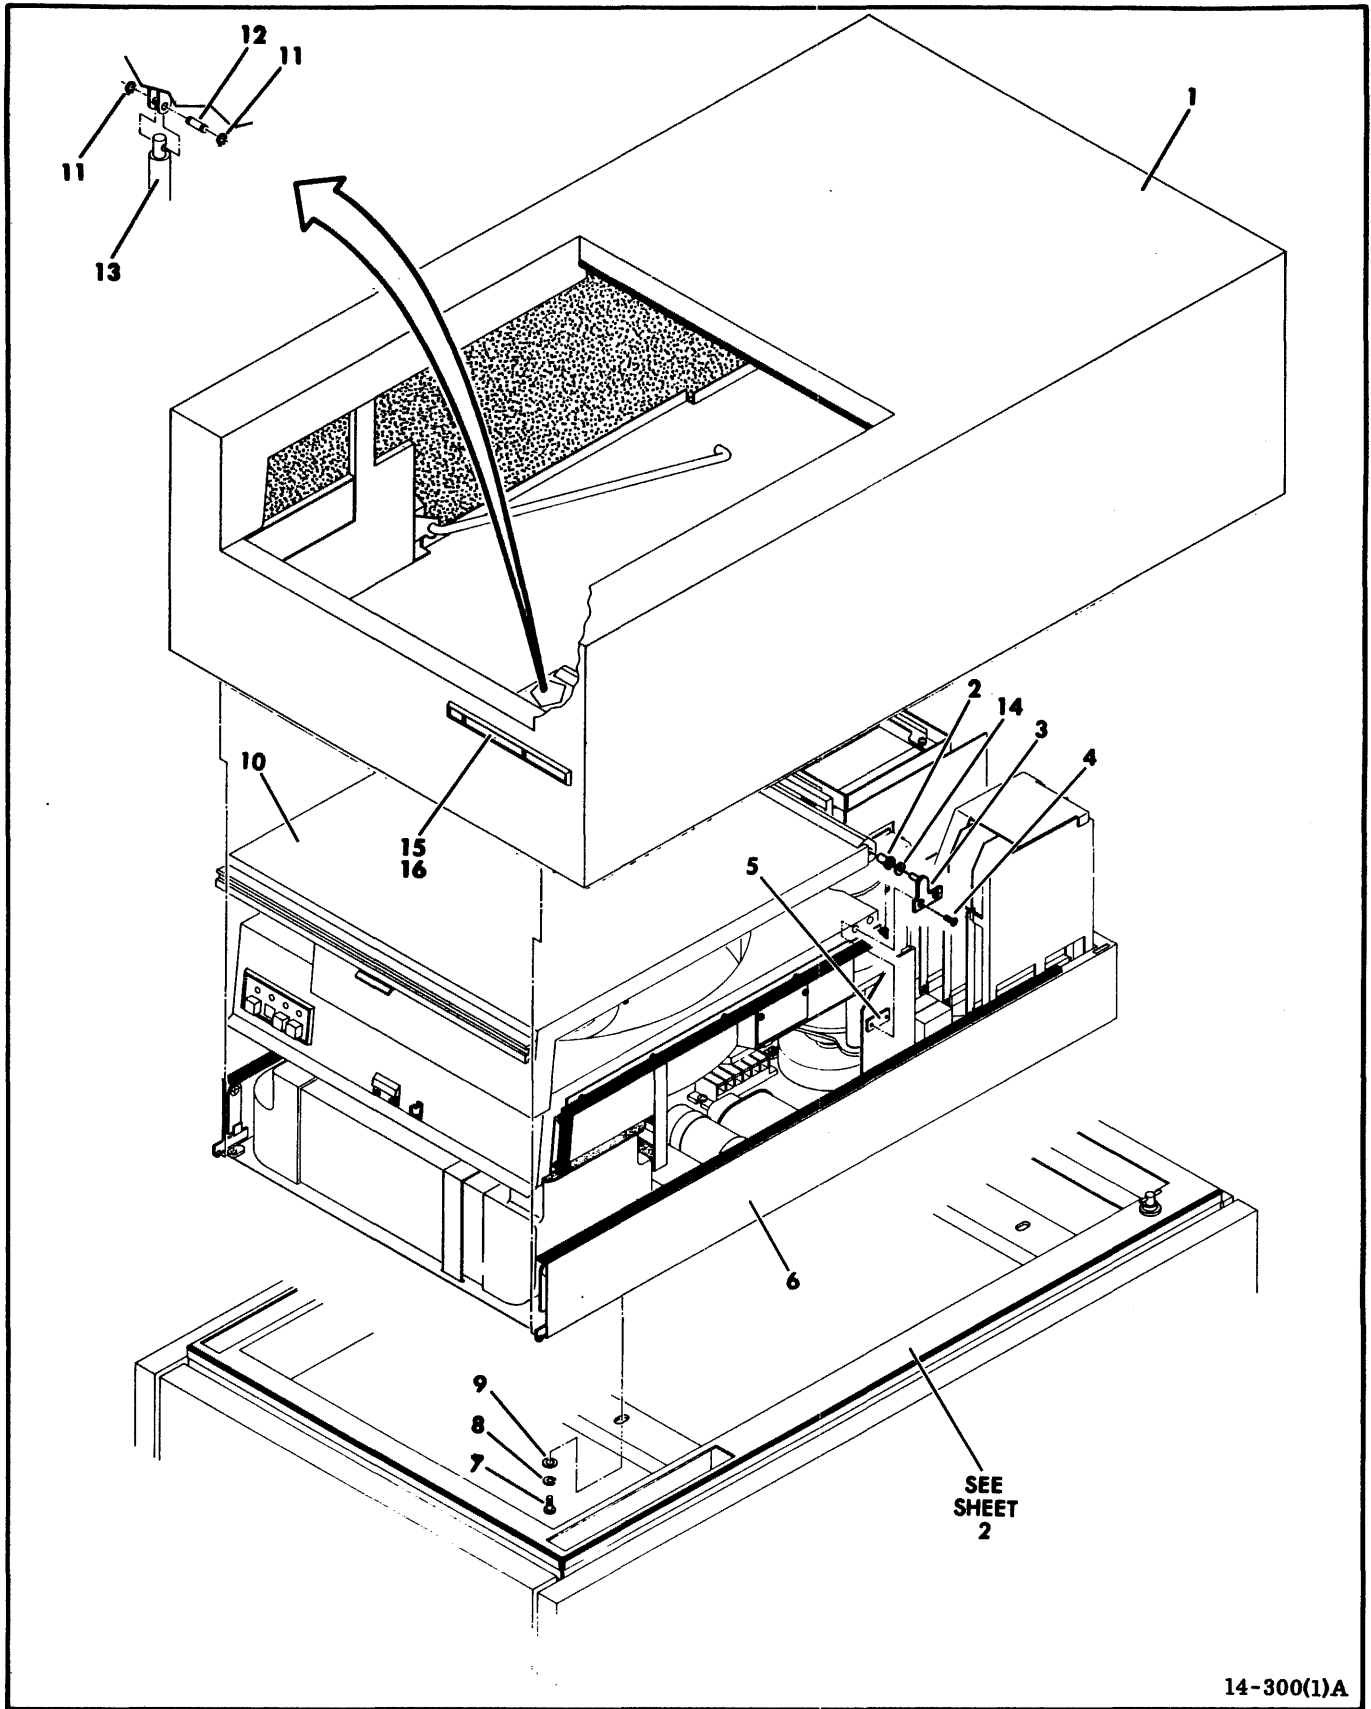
Final Assembly - Pedestal (Sheet 1 of 2)
